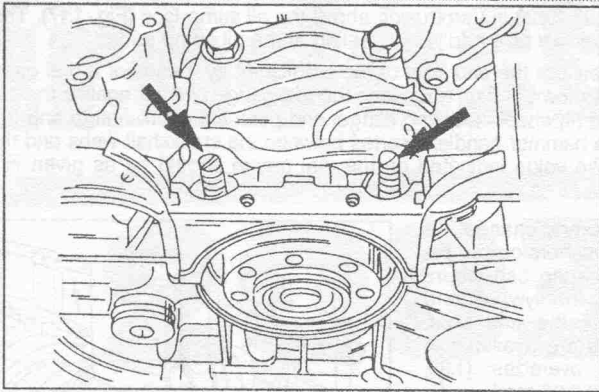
Installation of the rear main bearing cap. The arrows show the two studs in position. On the left and right are the two foil strips.
